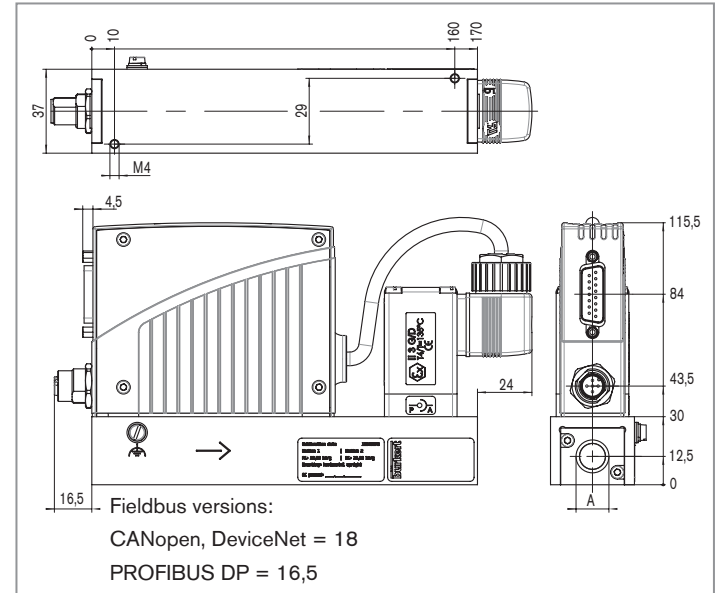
Dimensions of MFC with external solenoid valve, type 8711
